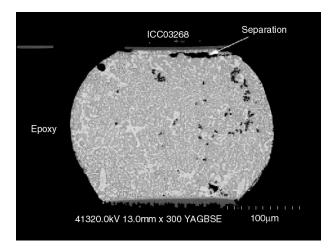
Typical Tin-Lead BLR Solder Fatigue Crack
